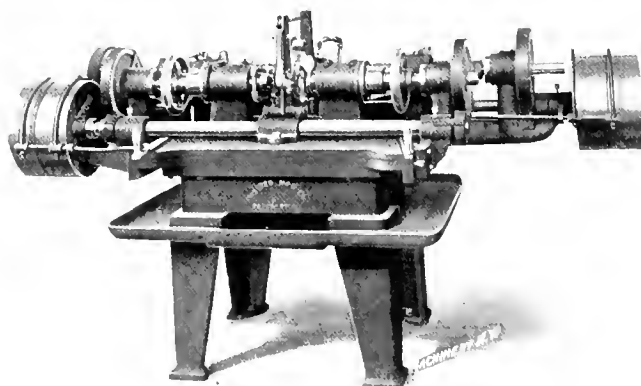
Front View of Hoefler Connecting rod Drilling and Facing Machine
